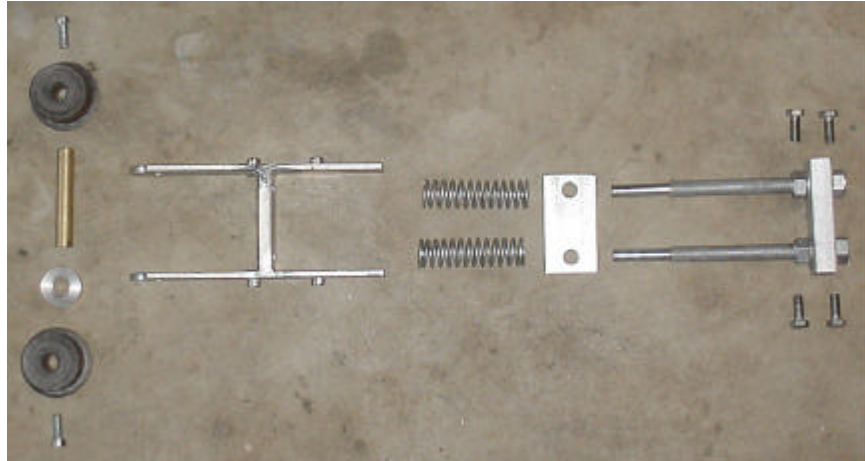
Layout of the complete front sliding axle unit and tensioning mechanism
